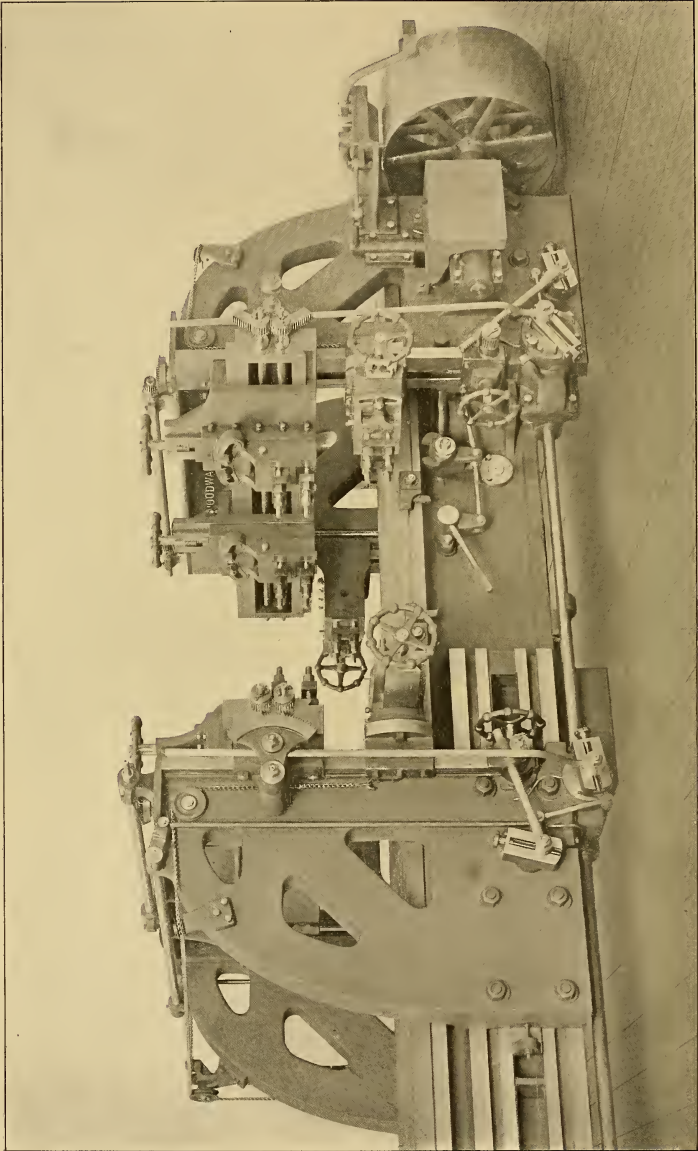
CONNECTING ROD PLANING MACHINE FOR RODS UP TO 11 FEET LONG. BUILT BY THE WOODWARD & POWELL PLANER CO., WORCESTER, MASS.. ONE HOUSING IS ADJUSTABLE ALONG THE BED
